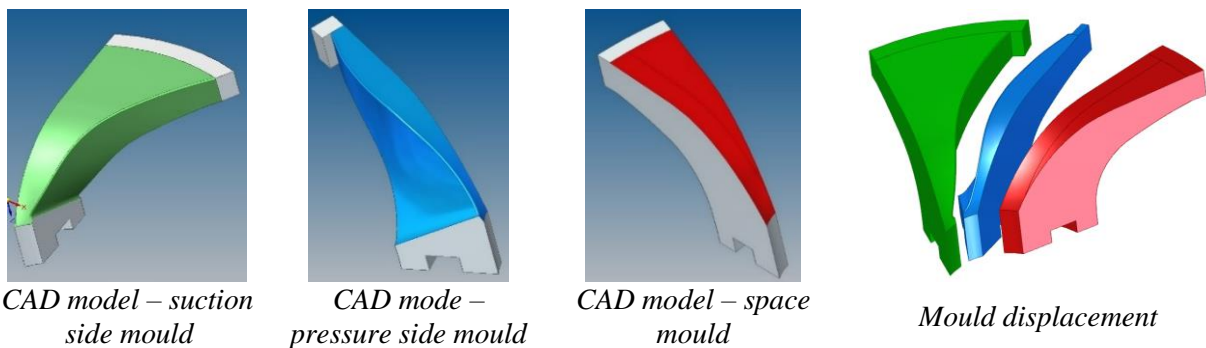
CAD models of the moulds used for blade and rotor manufacturing
